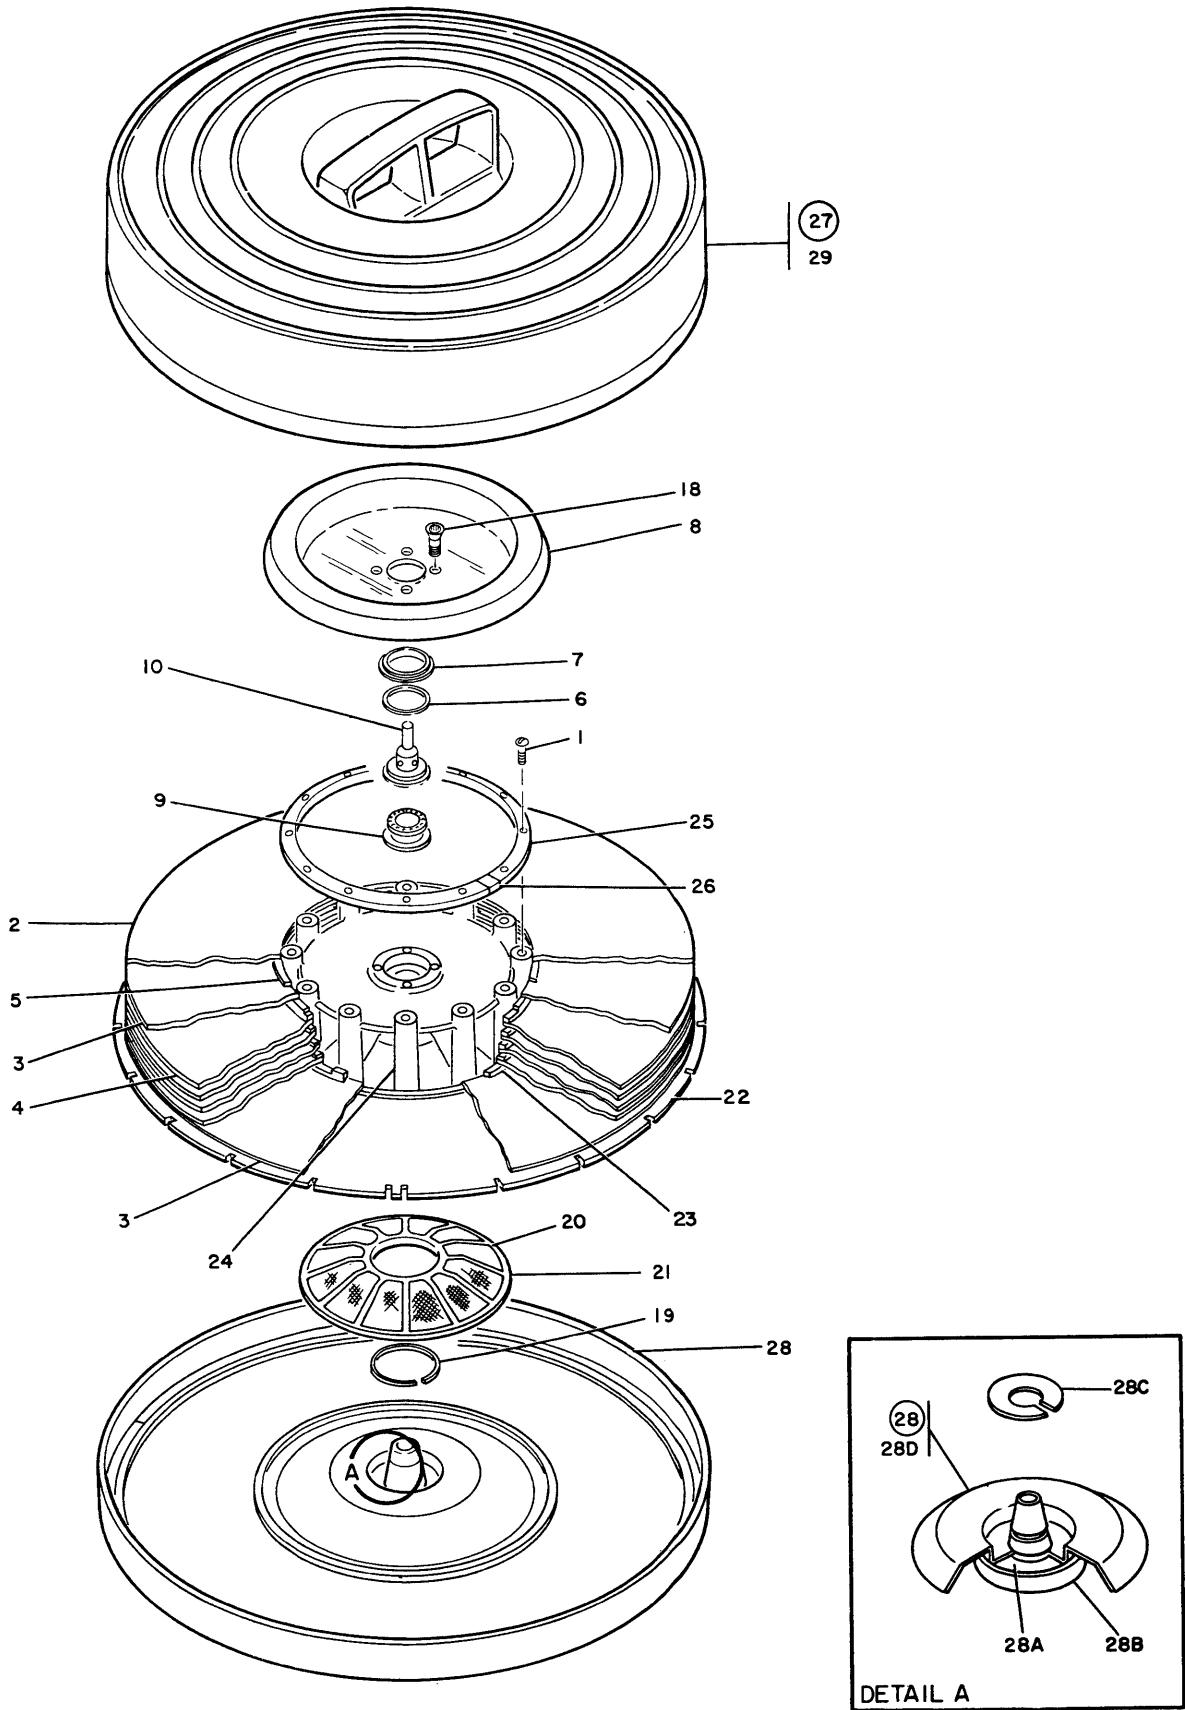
A. DISK PACK ASSEMBLY. SEE LIST 18A.
